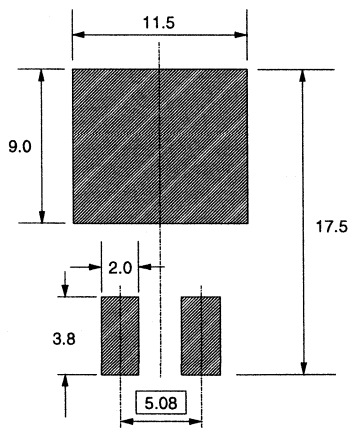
SOT404 : minimum pad sizes for surface mounting.
